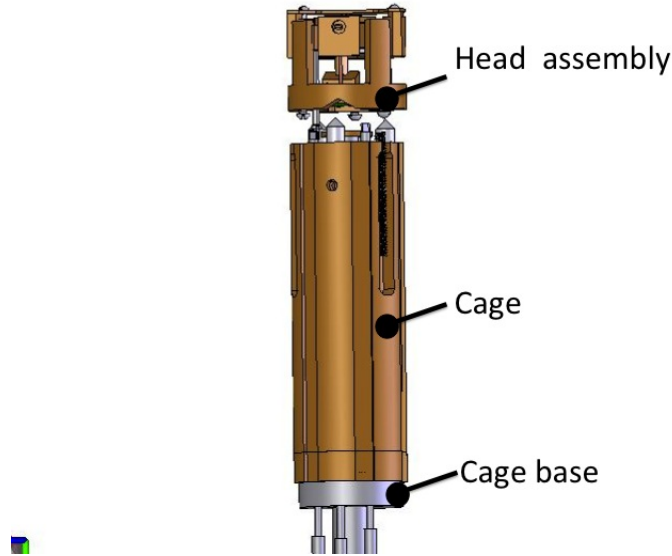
Illustration of microscope assembly noting the major components. Head assembly, cage assembly and the feedthroughs constitute the microscope. All the parts are made using brass for low thermal coefficient. The head assembly holds the tip, cage assembly houses the piezotube and allows access to the coarse positioning feedthroughs
